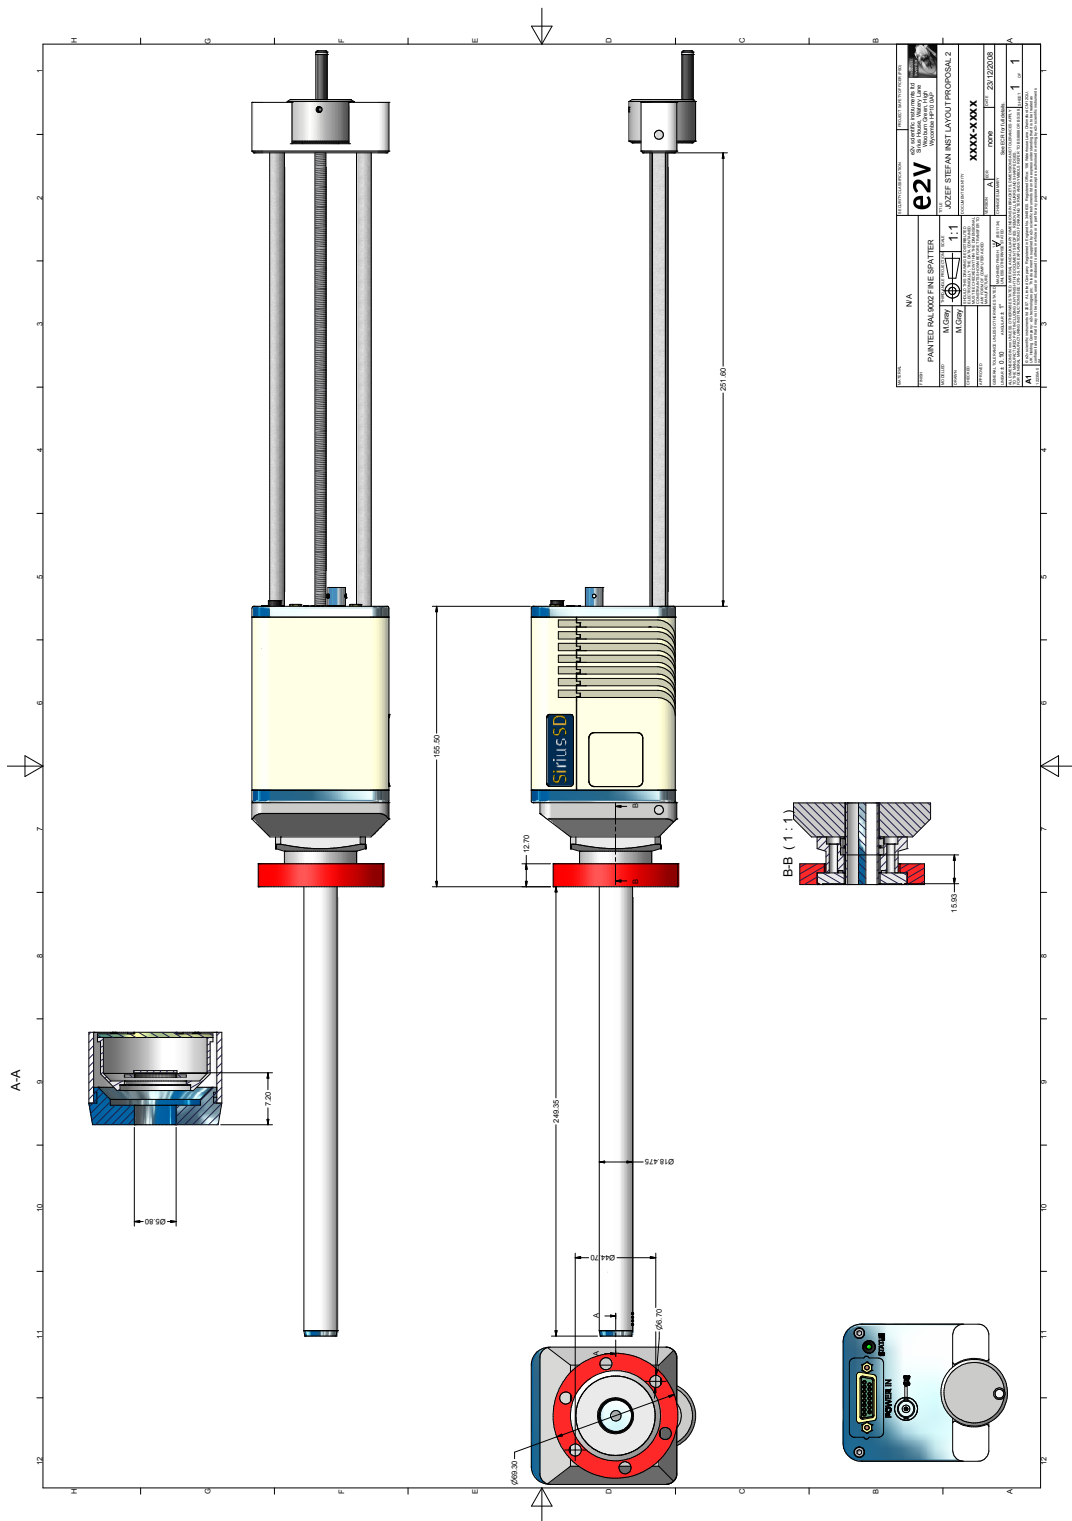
A layout of the new silicon-drift detector used in the CF PIXE set-up (technical drawing of e-2v company [59]).
